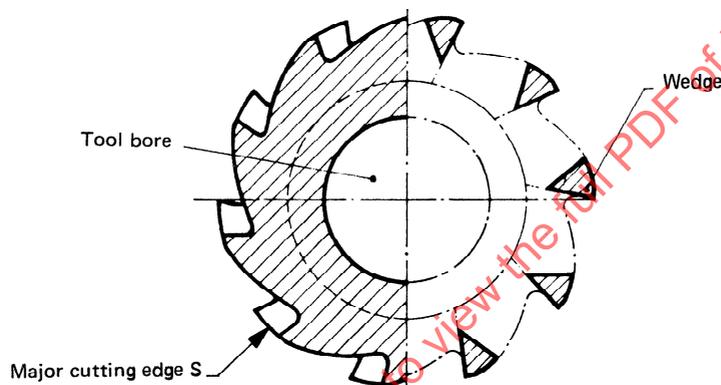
Cutting edges and surfaces on the cutting part of a shell end mill
